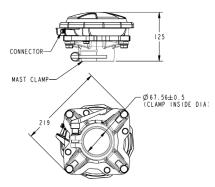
Technical Drawing of Zephyr 3 with 3"Mast Mounting PN 125000-10-INT
